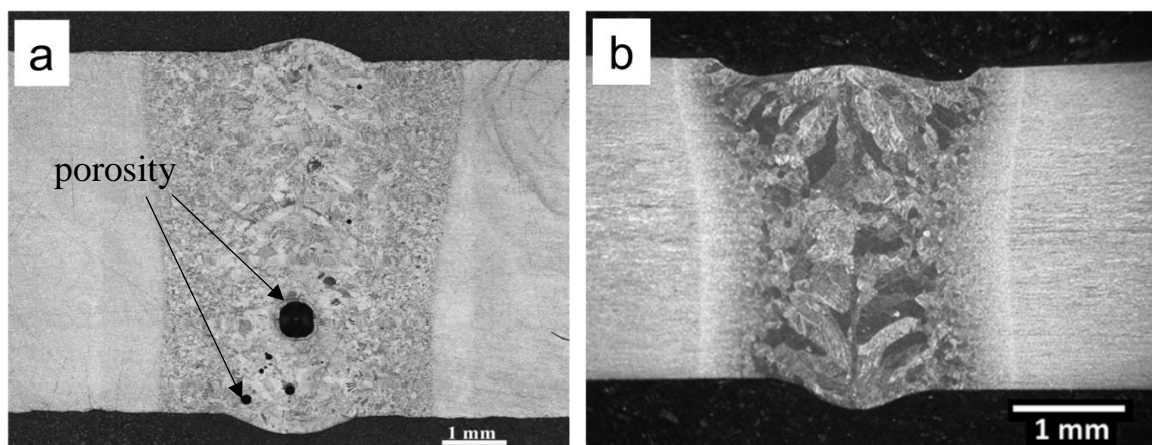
Defects in Titanium weld zones: a) porosity in cp-Ti welds [23], and b) undercut profile for a Ti-6Al-4V EBW weld [29].
